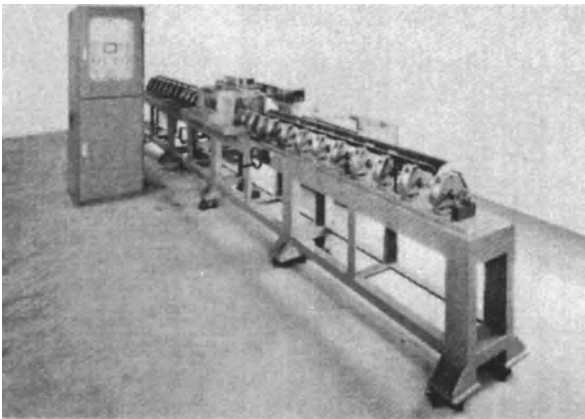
Testing installation for canning and precision tubing up to 25 mm in diameter (type RDR 25 J, design Krautkrämer, Japan)
